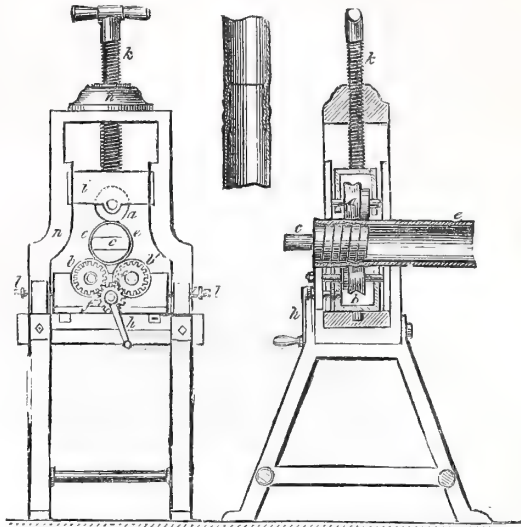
and 30 show, in elevation and in vertical section, a machine for stamping, by pressure, screw-ends on the pipes, to admit of their screwing together.
